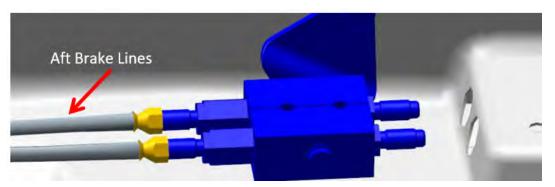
INSTALLATION OF BRAKE LINES ONTO PARKING VALVE
